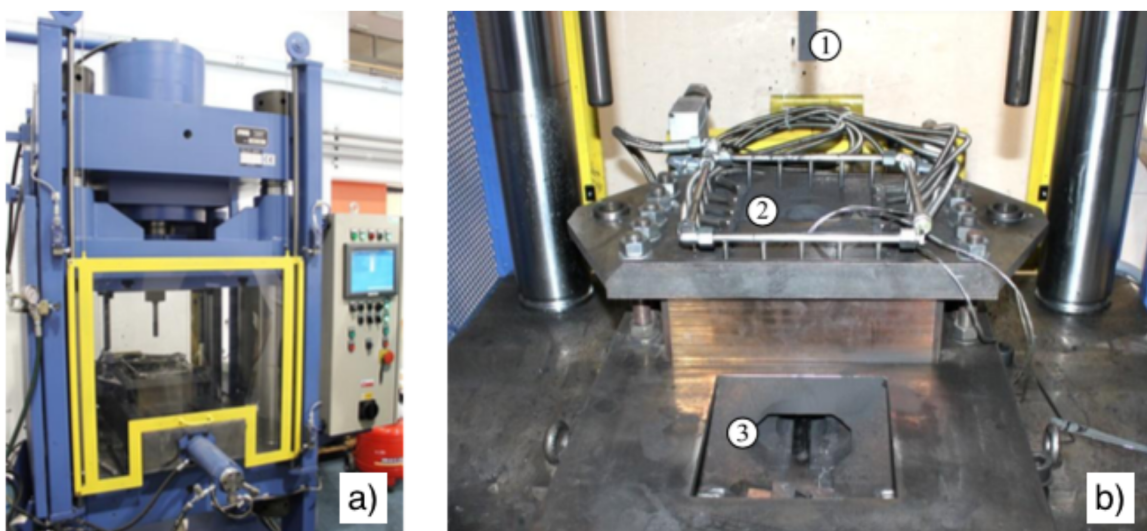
Equal channel angular machine (ECAP) a) ECAP in starting position b) ECAP die.
